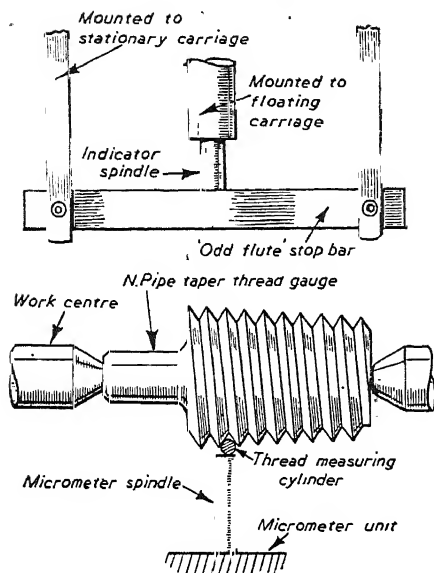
Thread-diameter measuring machine "set up" for measuring taper-thread plug gauge.
